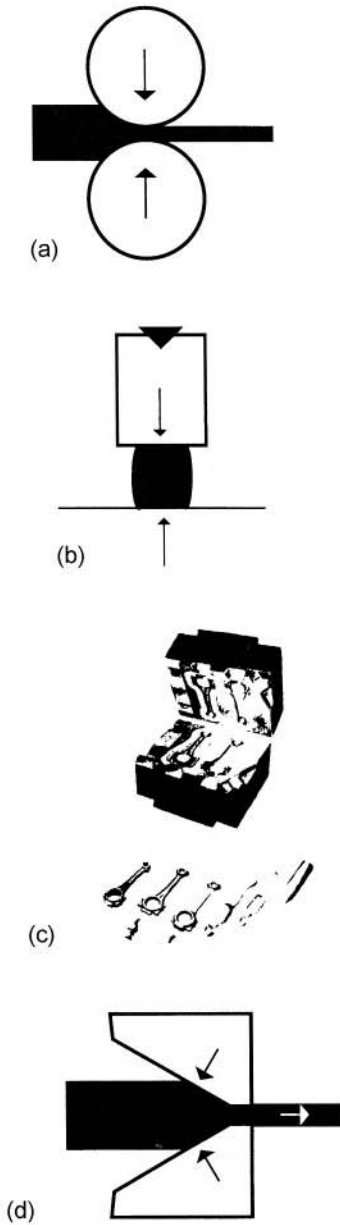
(a) Rolling. (b) Open-die forging. (c) Closed-die forging. (d) Wire drawing.
